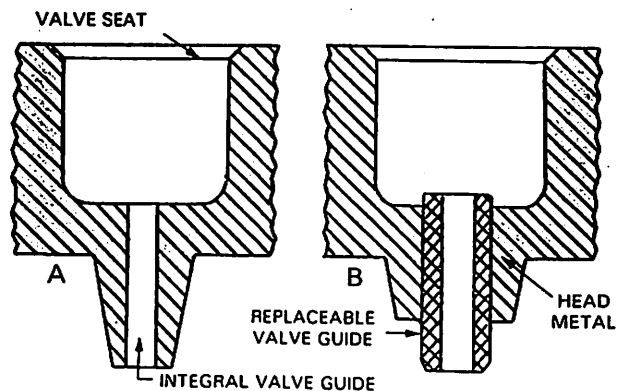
Examples of valve guides. A—Integral (not removable). B—Pressed-in (removable).
